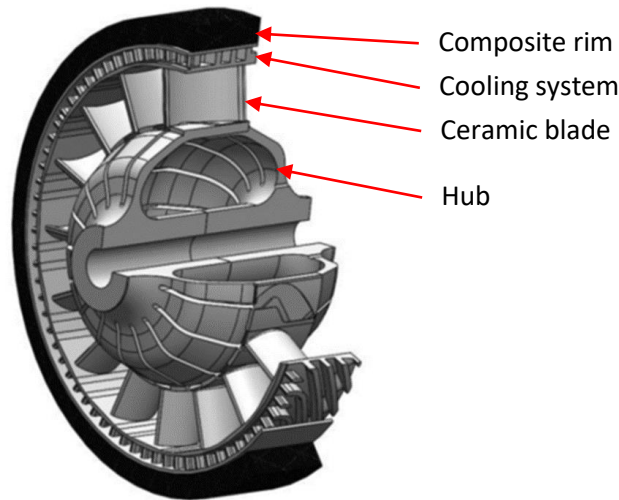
Inside-out ceramic turbine (ICT) rotating assembly [4]
